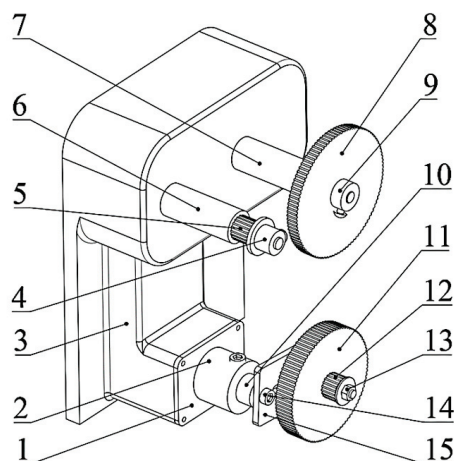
The three-dimensional assembly drawing of the hanging wheel mechanism: 1—cover plate; 2—shaft seat; 3—hobbing machine body; 4—fix bolt of axial synchronous belt wheel; 5—axial synchronous belt wheel; 6—axial rotary shaft; 7—radial rotary shaft; 8—radial synchronous belt wheel; 9—fix bolt of radial synchronous belt wheel; 10—center rotary shaft; 11—large center synchronous belt wheel; 12—small center synchronous belt wheel; 13—fix bolt of the hanging wheel; 14—connecting plate screws; 15—connecting plate.
